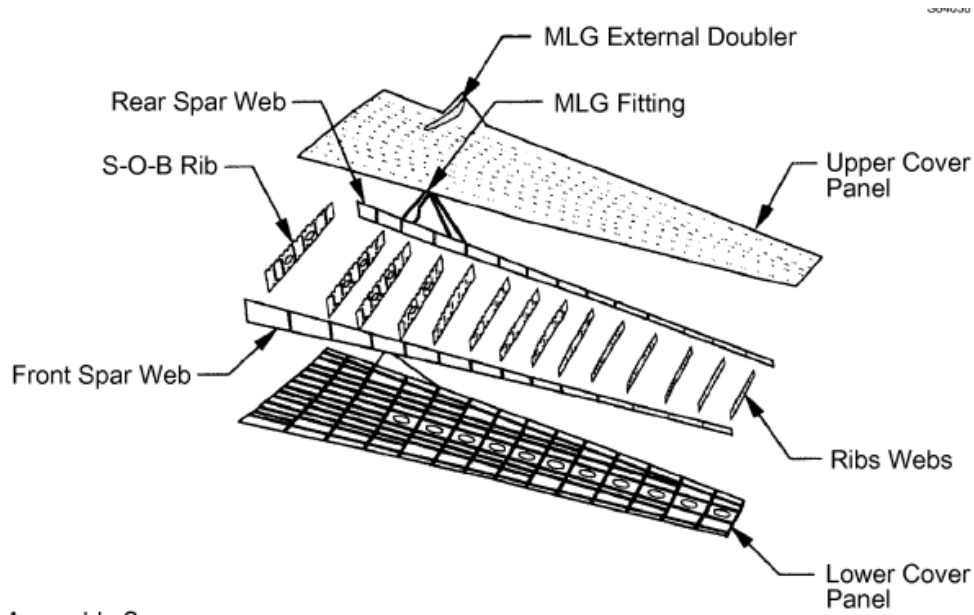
Exploded Isometric View of a Conventional Transport Aircraft Wing [118]
